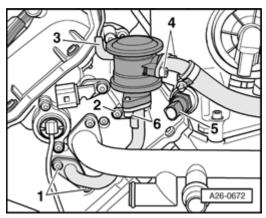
Disconnect Vacuum Hose, Electrical Harness Connector From Oil Pressure Switch F1, Removing Bolts & Oil Pressure Switch
